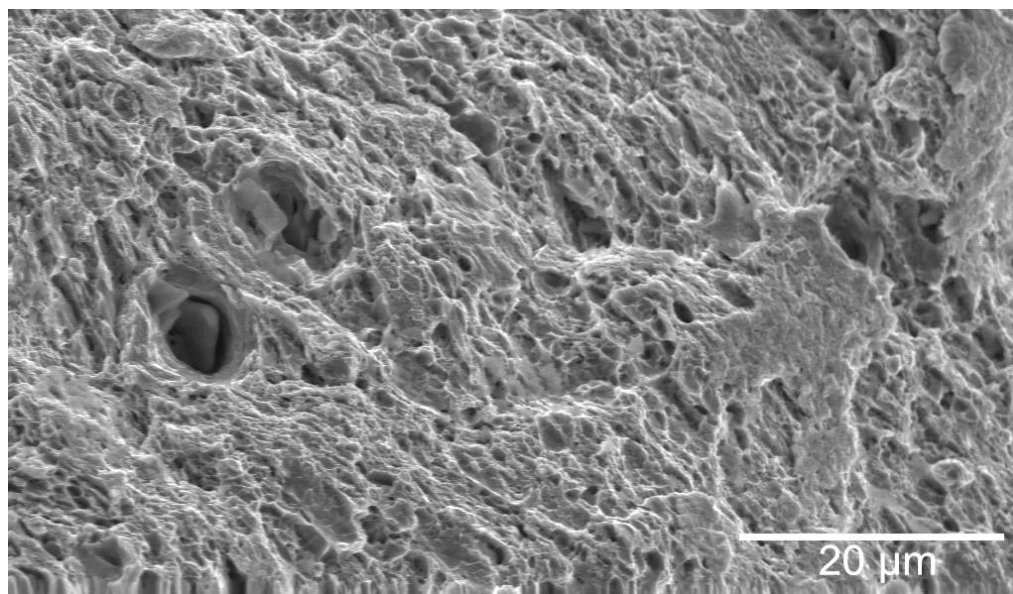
Microscopic View of a Sound Monotonic Test Specimen Fracture Surface (Specimen A3)
